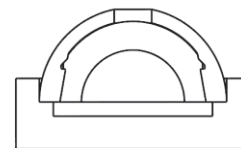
Cross-sectional view of acetabular cup and a testing base before redesigning.
